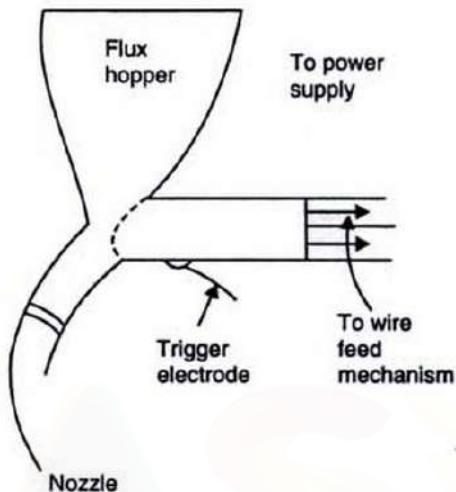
Apparatus used in manual submerged arc welding.
